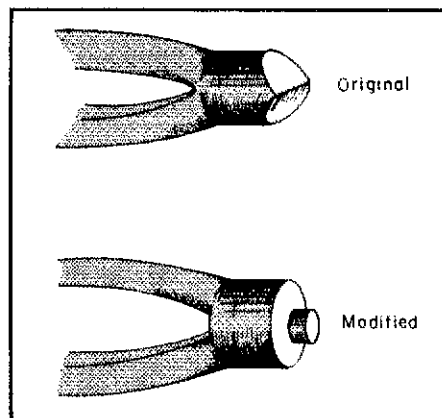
Bob McKay assembles PL-259 connectors with a soldering-gun tip filed to this shape. Be prepared to reshape or replace such a tip every few soldering jobs, though: Soldering-gun tips erode with use, contributing a fraction of their copper to every joint they solder.
